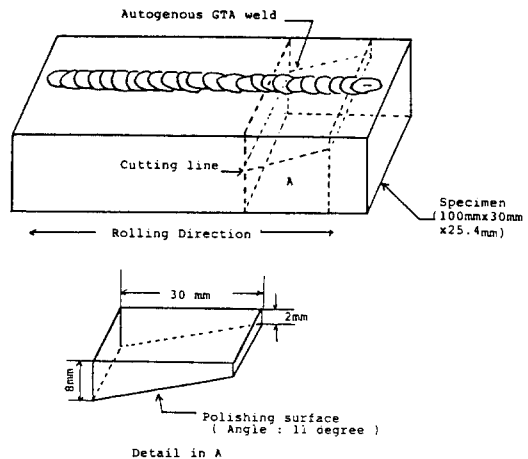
Geometry of angle-cut specimen taken from autogeneows GTA weldment.
